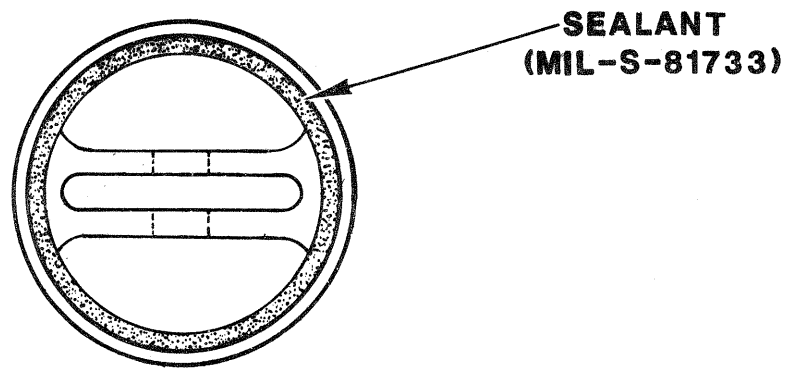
ELASTOMERIC DAMPER (END VIEW)
